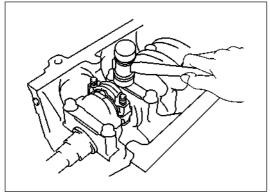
Tap the Bolts of Connecting Rod by Hammer Lightly
